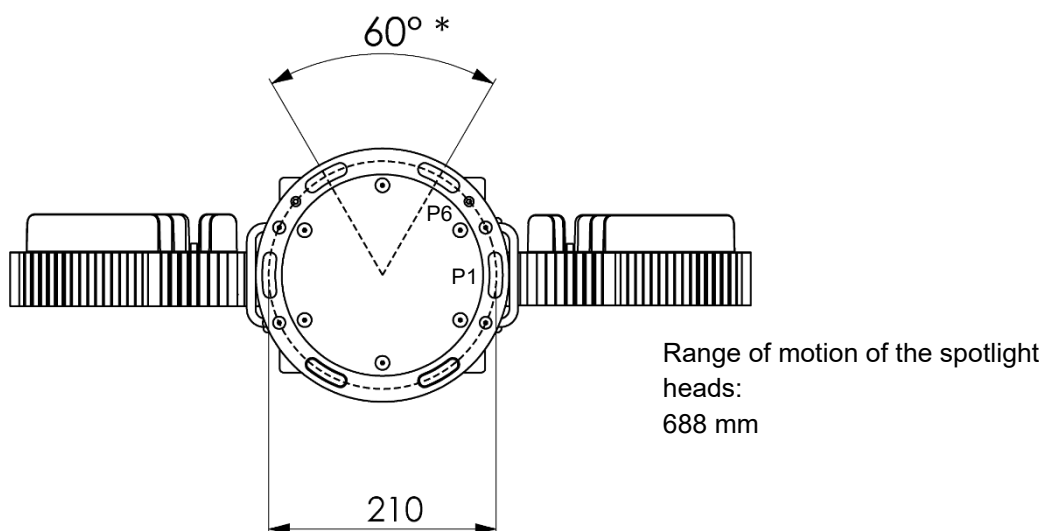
Mounting holes (hole circle  $\varnothing$  210 mm)
